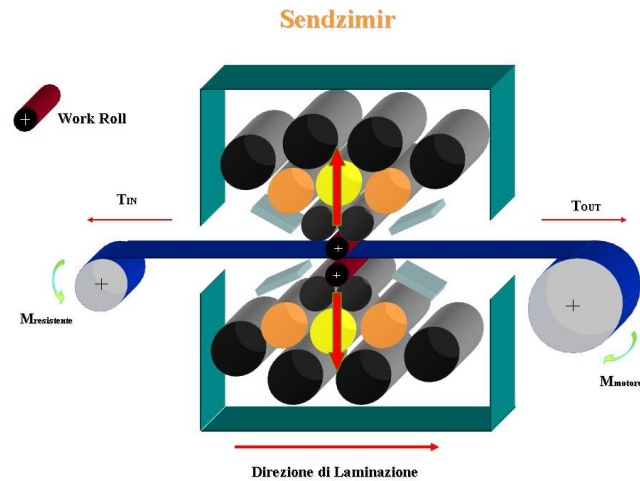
"20 Hi" Sendzimir cold rolling mill scheme - whole mill
